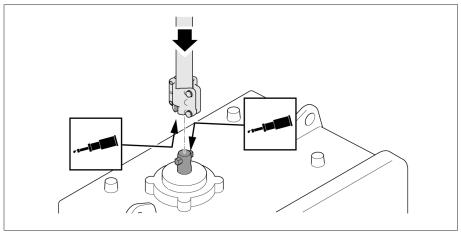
Sliding square tube with coupling part onto shaft end $\,$
